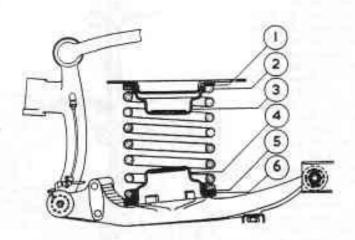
FRONT SUSPENSION SPRING IN POSITION.
